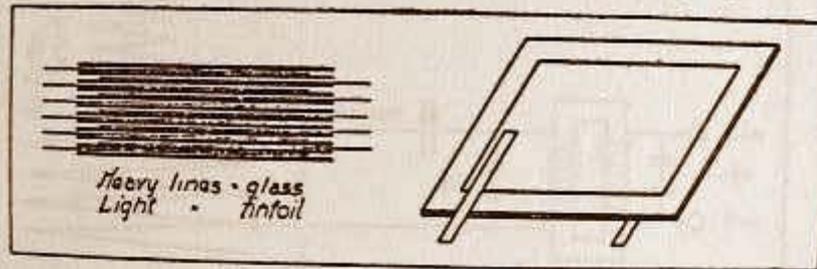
Single plate of the condenser coated on both sides with tin foil also the way in which ten plates are piled one on top of the other to form a complete unit. This assembling having been done with the entire lot of plates, the projecting lugs may be clamped with the pliers and soldered to short lengths of copper ribbon ready for connection with the bus-bars of the condenser. The plates of each unit should be bound with tape to afford mechanical strength and ease of handling. A plain piece of glass is placed on either side of each unit under the binding tape.
